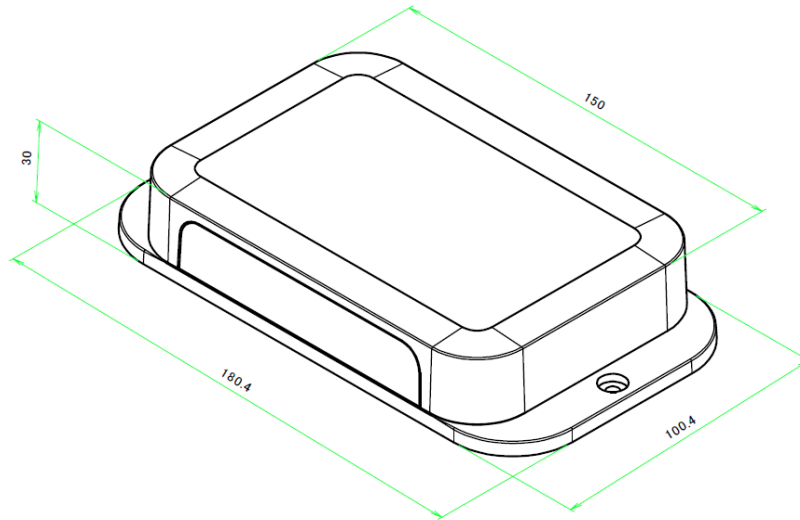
ZK-200 Dimensions of wall mount Enclosure
